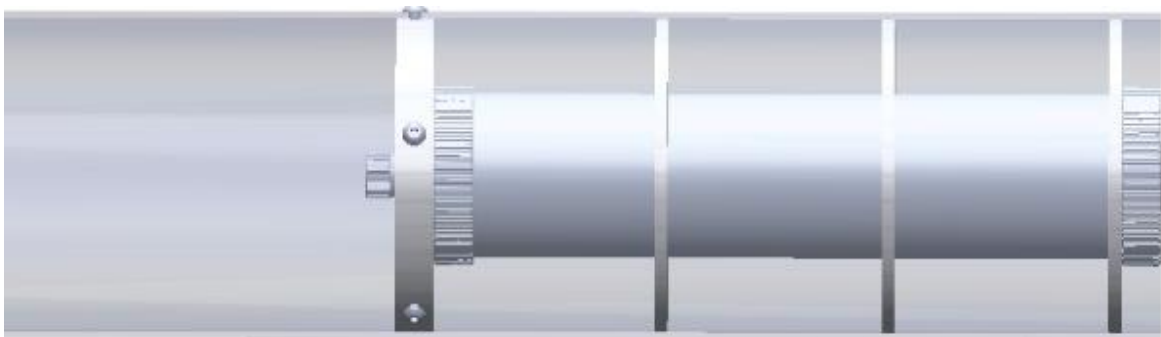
MOTOR BAY ALONG WITH THE MOTOR
